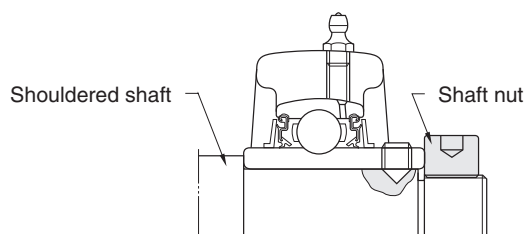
Example of installation with a shouldered shaft and shaft nut
